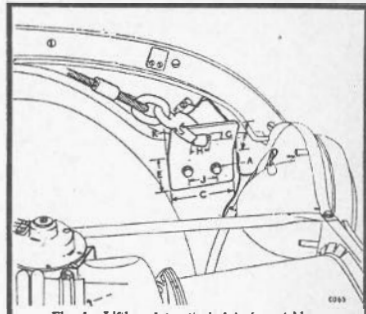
Lifting plate attached to bonnet hinge securing screws
